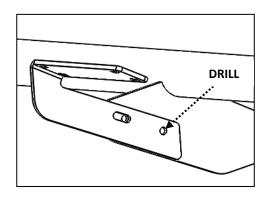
Drill 2<sup>nd</sup> hole on bracket and bolt together using 1/4" hardware.
